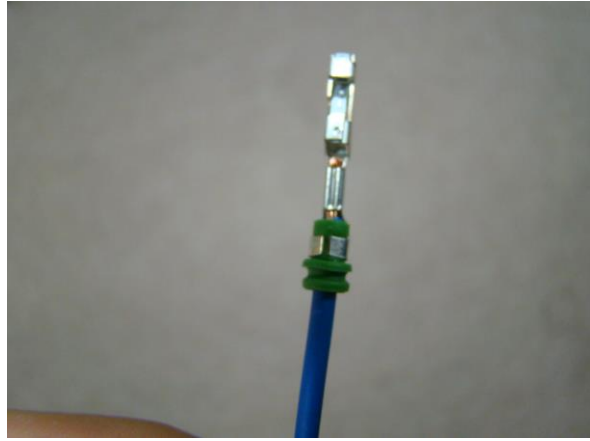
The terminal is fully crimped to the wire through the wings and the seal clamps.
